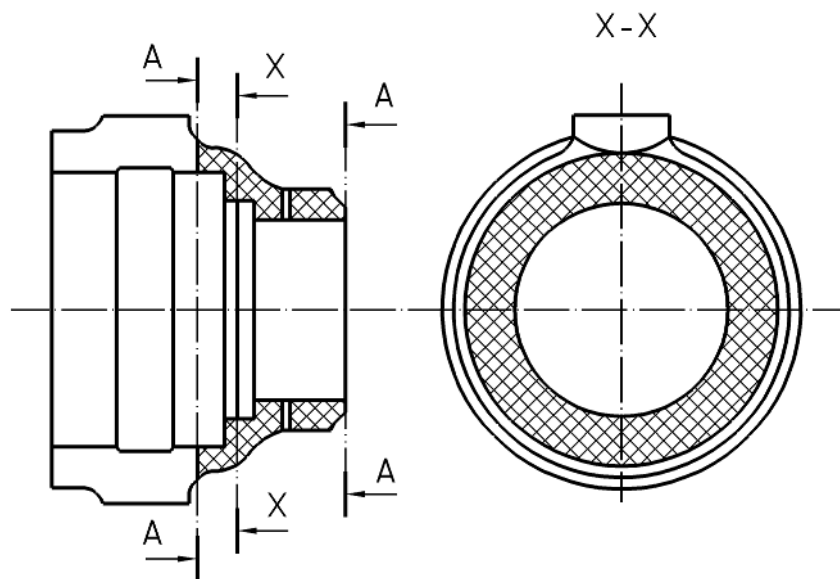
Typical casting section showing required radiographic examination of ball valve body
